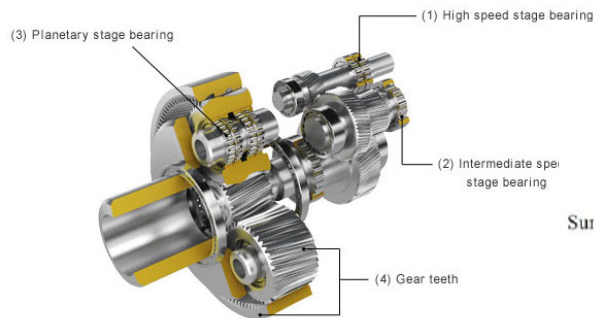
The planetary and parallel gearbox stages of a wind turbine drivetrain (Olympus, 2018)
